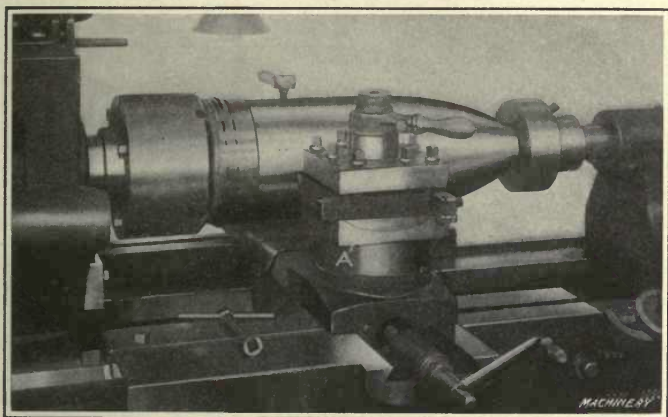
Set-up for turning Copper Band to Shape on a 24-Inch Engine Lathe
